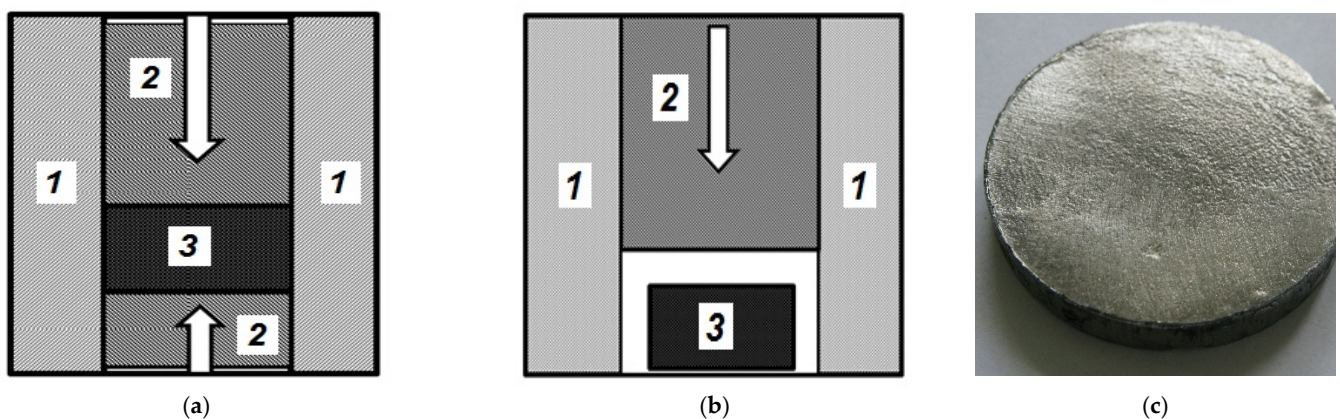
Scheme of the two-stage compaction; 1—mold matrix; 2—upper and bottom punch; 3—specimen; (a) cold-pressing of the powder mixture in press molds with diameters of 20–39 mm; (b) compression of heated preform in a press mold with diameter of 40 mm; (c) hot-compacted specimen with diameter of 35 mm.
